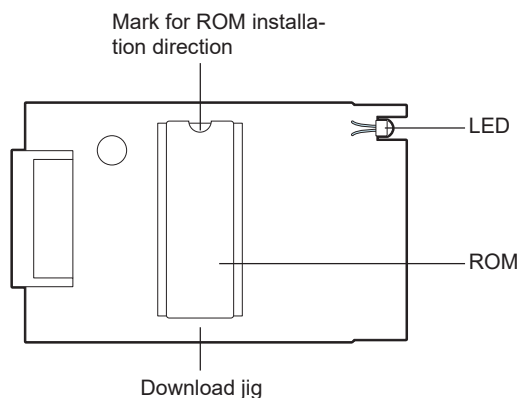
[Jig board: K-PWA-DLM-320]
